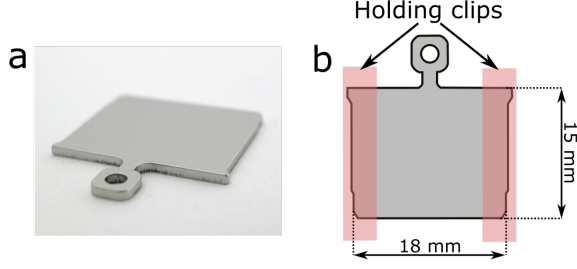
Flag style sample holder (a) photo of the sample plate. (b) specification and dimensions of the sample holder
